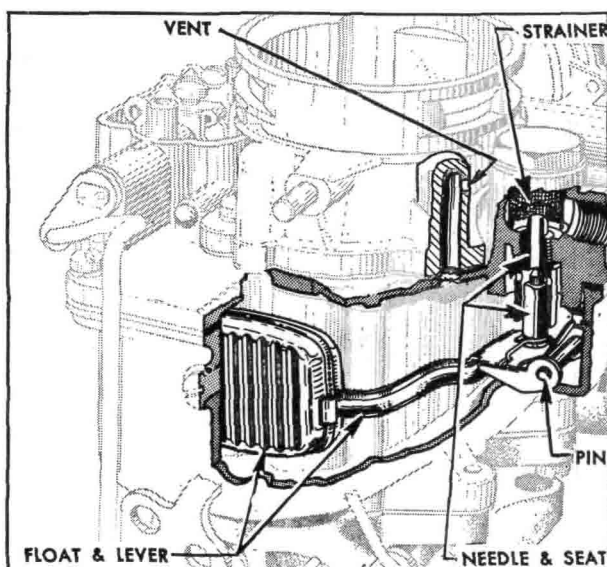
Cutaway view of a carburetor with a “wrap-around” float bowl and dual-float assembly. (Buick Motor Division of General Motors Corporation)
